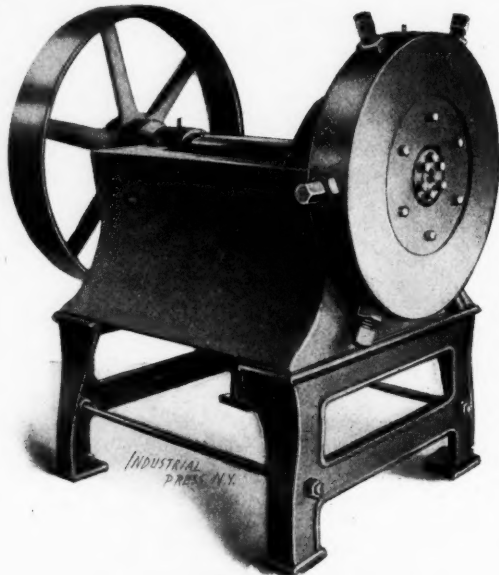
Goodyear Rotary Swaging Machine. Waterbury Farrel Foundry & Machine Company.)
